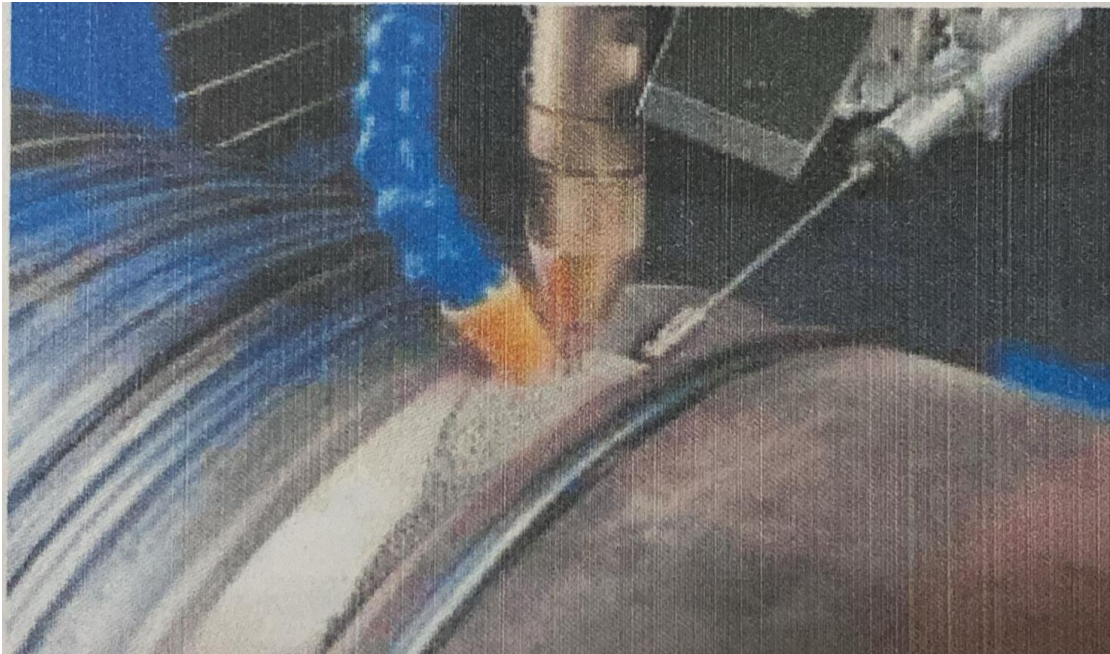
Submerged Arc Welding (SAW)
